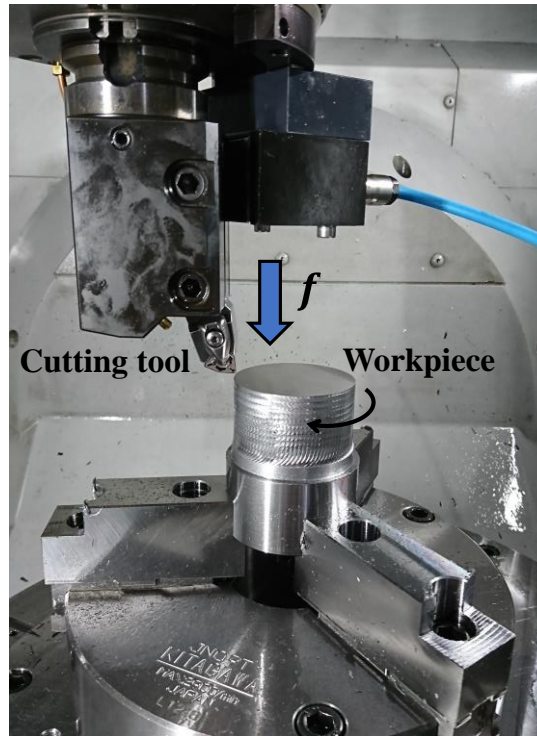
Experimental setup for turning in the 5-axis machining center.
